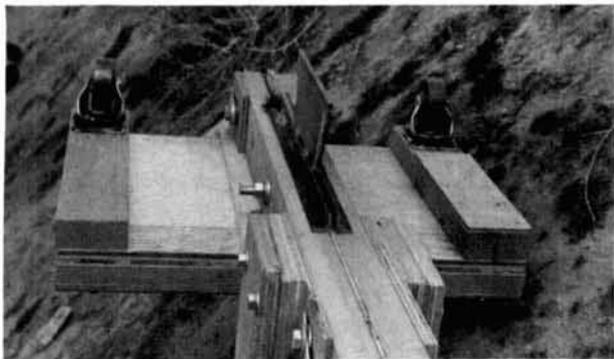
Bottom view shows blade, tack-welded to angle iron screwed into position. Wire guide tube is welded to trailing edge of blade (foreground).
